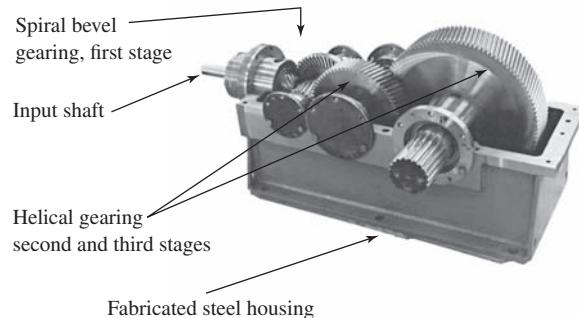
Three-stage industrial gear reducer employing spiral bevel and helical gears (Sumitomo Machinery Corporation of America, Teterboro, NJ)
